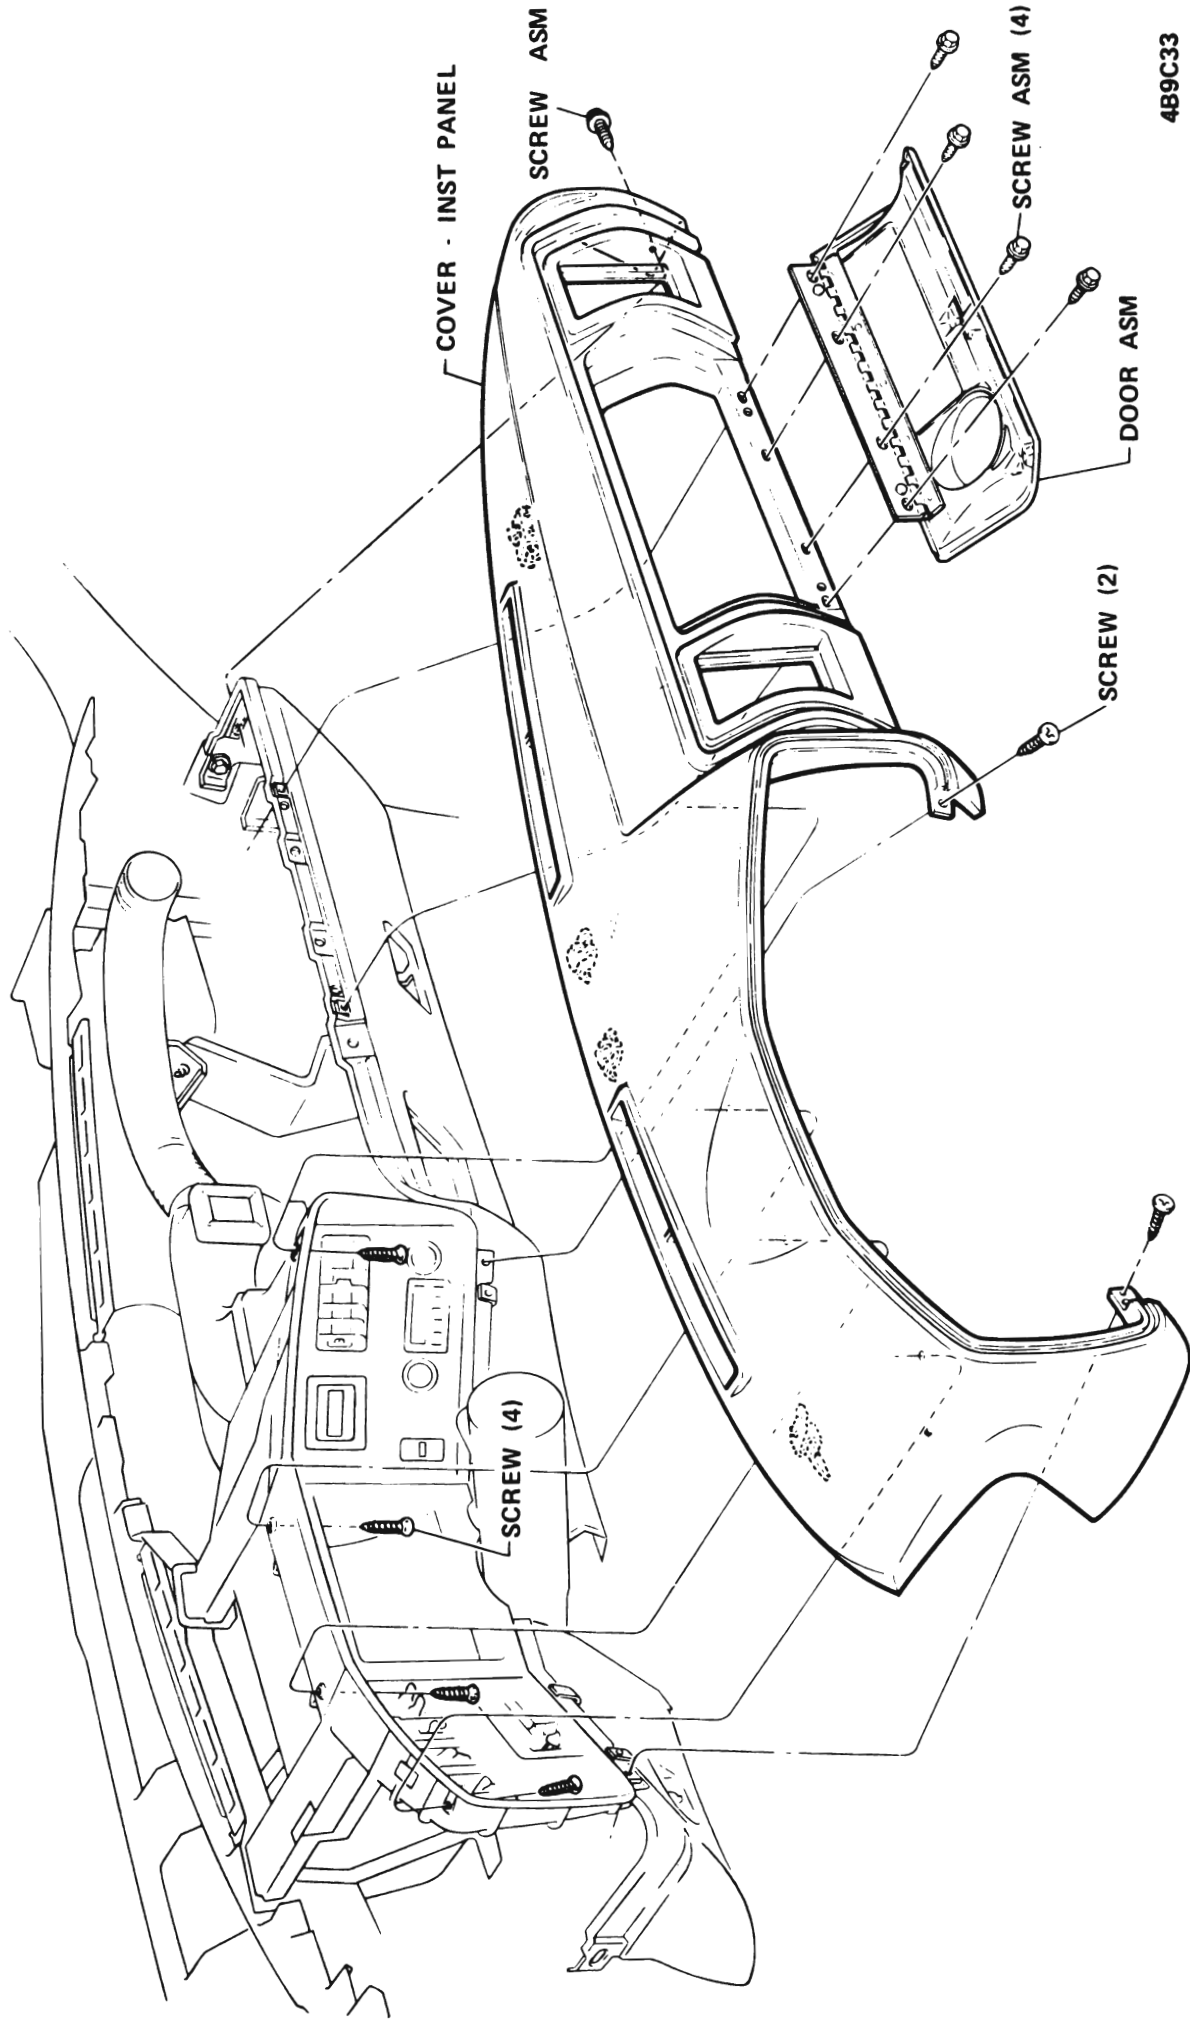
C-46 Instrument Panel Cover Assembly - "B-C-E" Series
